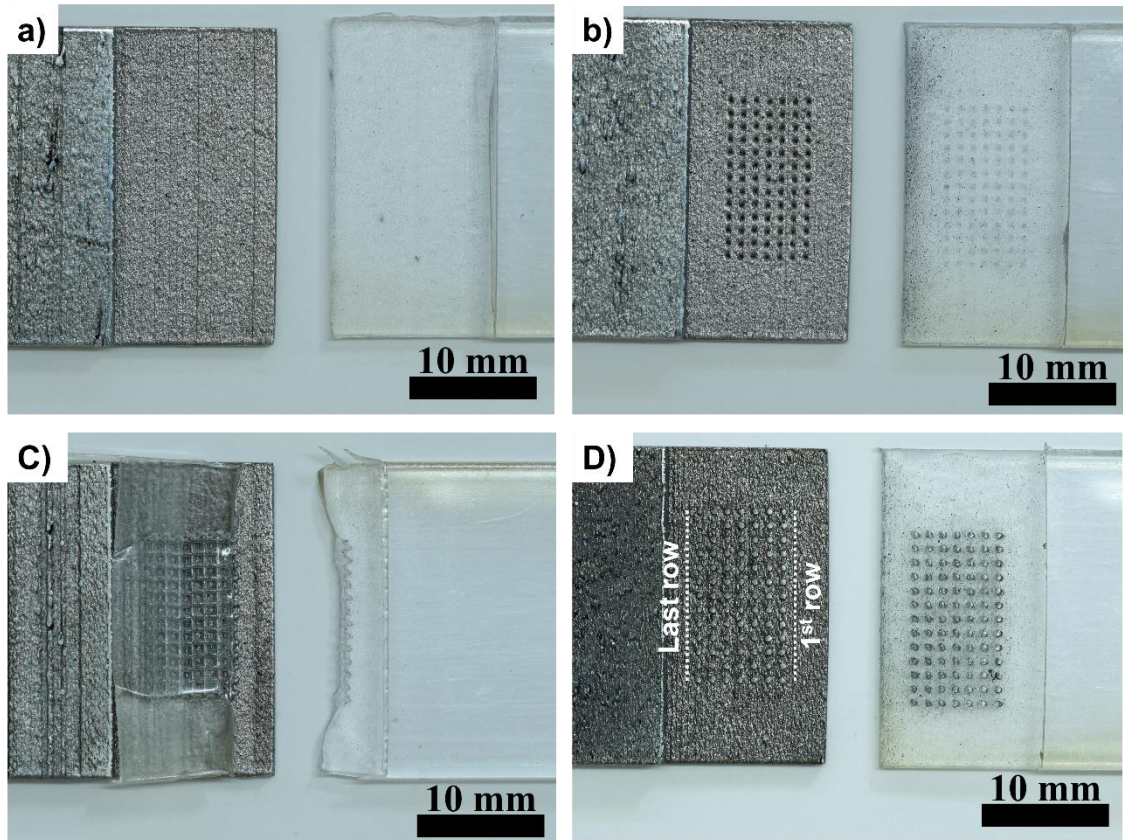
Metal and polymer fracture surfaces of PC/AlSi10Mg hybrid joints prepared with additively manufactured and structured metal inserts subjected to lap-shear testing. a) As-built surface; b) Inkpot-like structures; c) Lattice structures; d) Mushroom-like structures. Hybrid joints were produced with the optimized parameters Condition C4 (Table 3.5) and L-PBF-6 (Table 3.4) for injection overmolding and 3D-printing of metal inserts, respectively.
